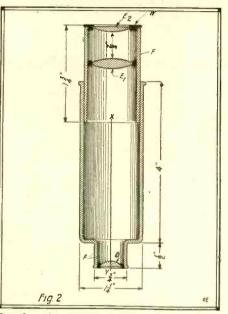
This Sectional View of the Micro-scope Shows How the Metal Tubes of Brass, Copper, or Other Covering Are Arranged to Slide Within One Another; the Objective Lens Belng Placed at O, and the Two Image-Magnifying Eye-Piece Lenses at E-1 and E-2.
